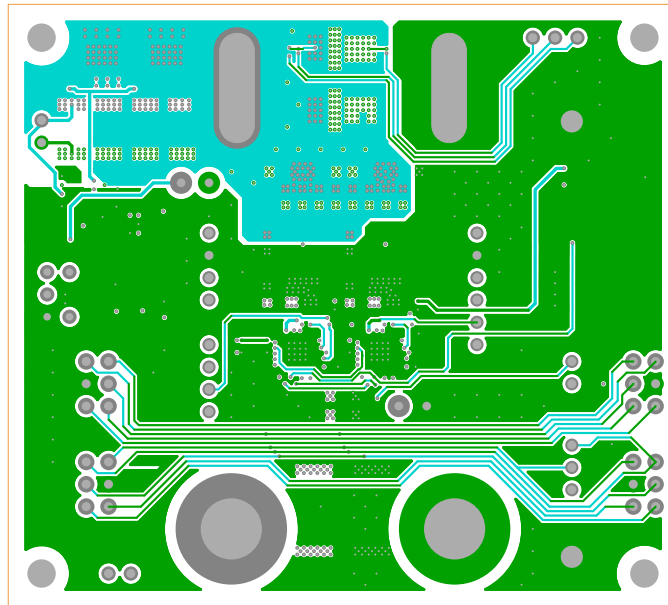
PCB - Inner Layer - Layer 3 (Top View)
